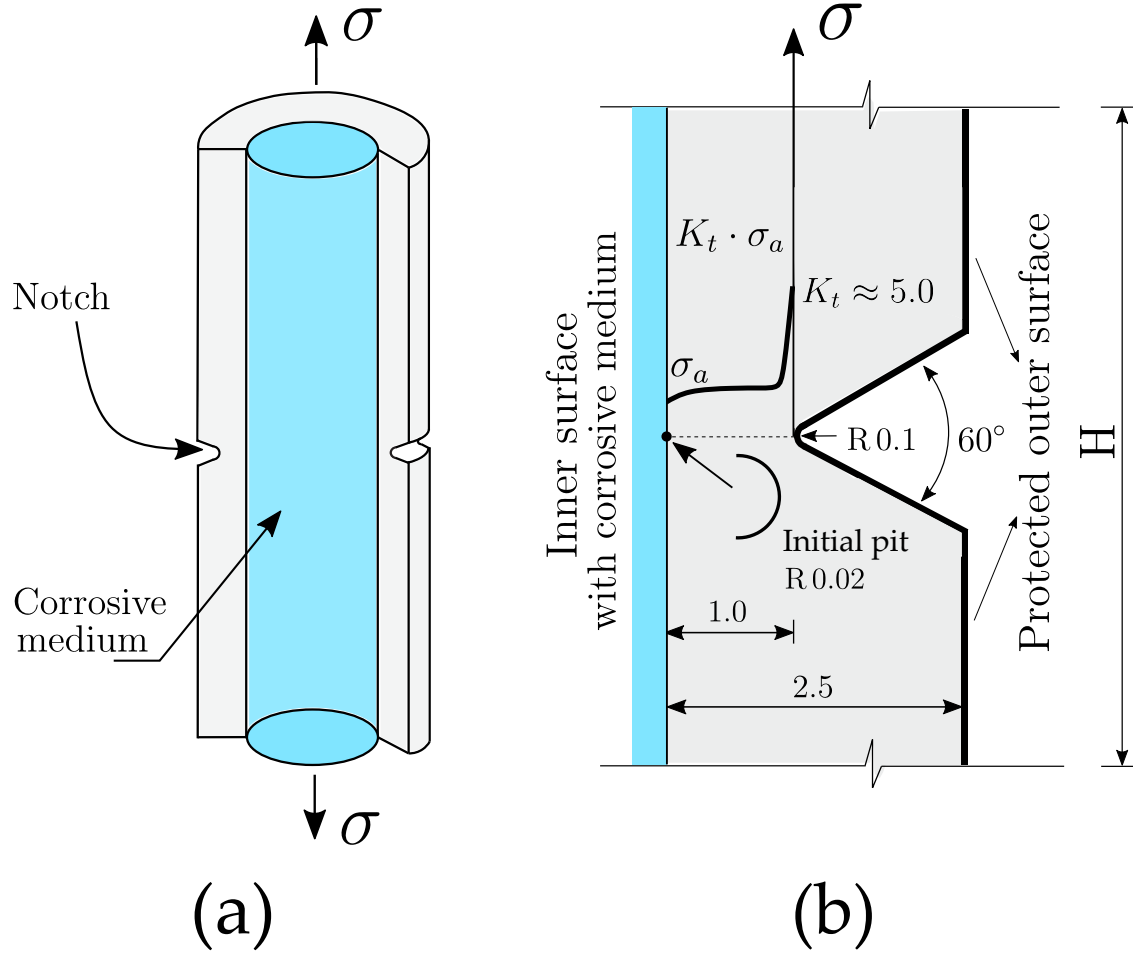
Gruhl (1984) experiments: (a) Testing configuration, and (b) detailed view of the geometry, with dimensions given in mm. Anodic-driven damage mechanisms should trigger cracks in the surface in contact with the environment, while cracking due to hydrogen embrittlement will be favoured near the notch region, where hydrogen accumulates due to higher hydrostatic stresses.
